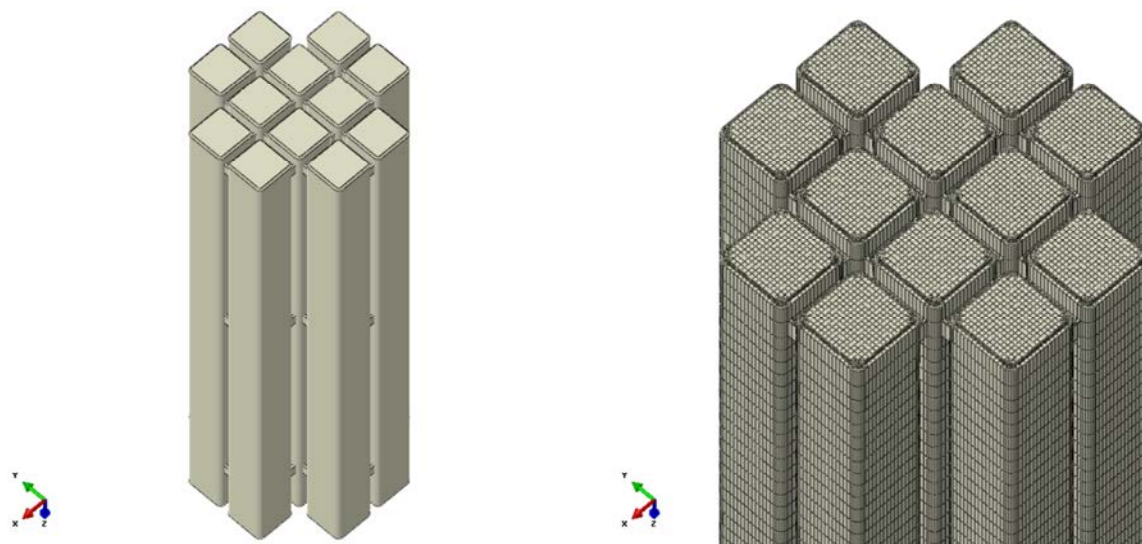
Steel channel tubes geometry (left) and mesh (right) – base view.
